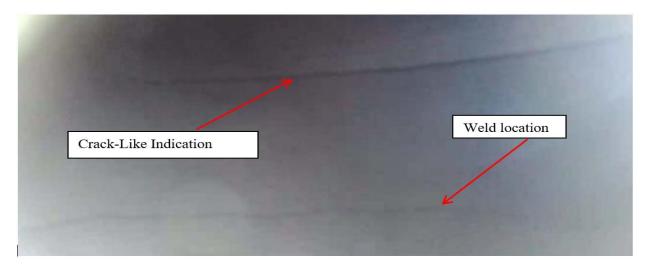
Crack-Like Indication Identified by Visual Inspection
